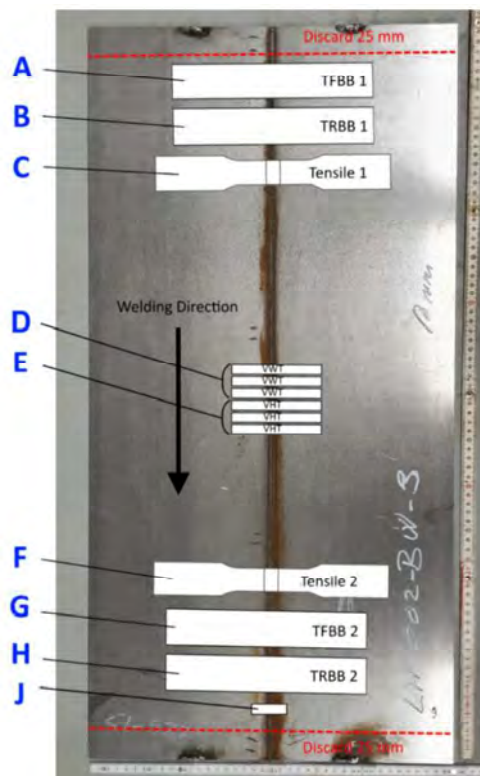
Shows location of test specimens and specimen ID. A=Transverse Face Bend Specimen (TFBB), B=Transverse Root Bend Specimen (TRBB), C=Transverse Tensile Specimen, D=Charpy specimen (V - Charpy V, W – Notch in weld, T – Notch through thickness), E=Charpy specimen (V - Charpy V, H – Notch in HAZ, T – Notch through thickness), F=Transverse Tensile Specimen, G=Transverse Face Bend Specimen (TFBB), H=Transverse Root Bend Specimen (TRBB) and J=Macro and hardness test specimen
